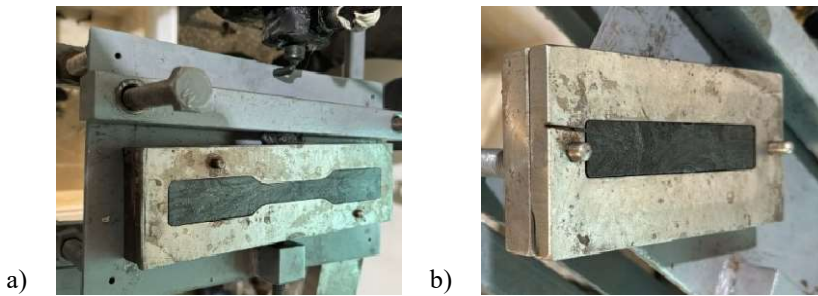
Manufactured specimens: (a) for tensile test and (b) for flexural test.
